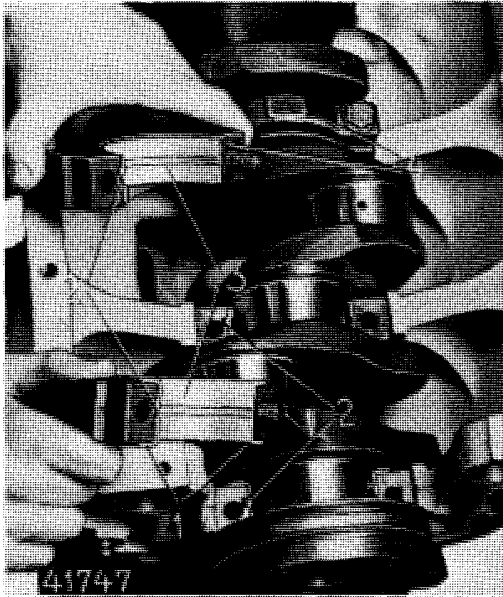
Installing Crankshaft Bearing Caps and Inserts
